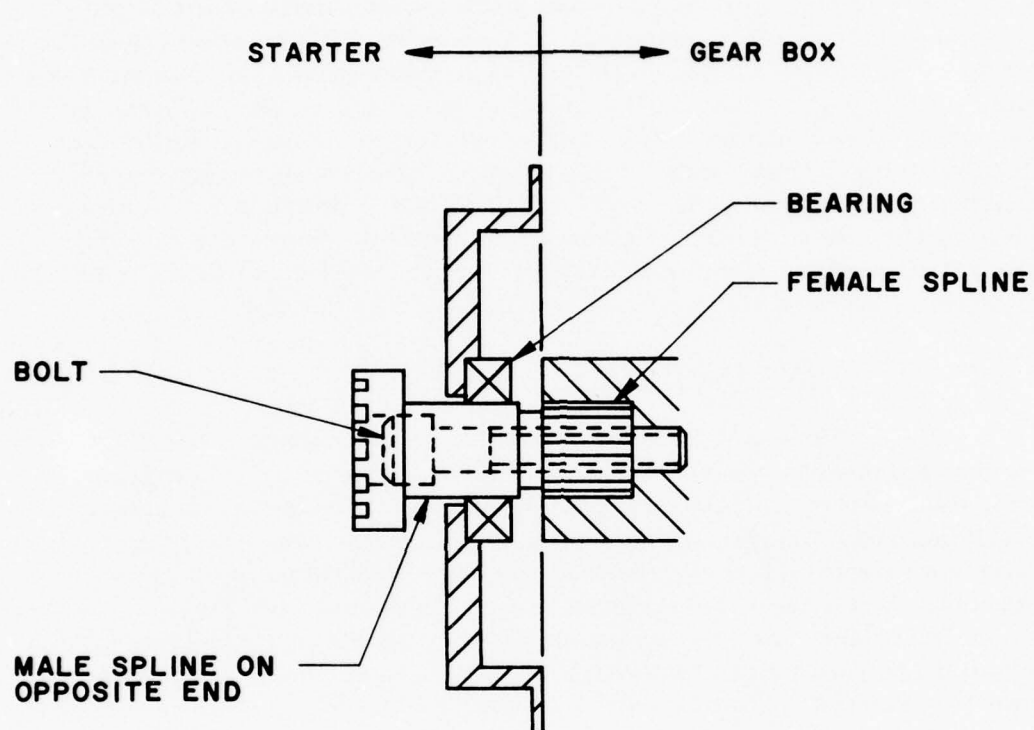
AUTOMATIC DISENGAGING GEAR-TYPE
